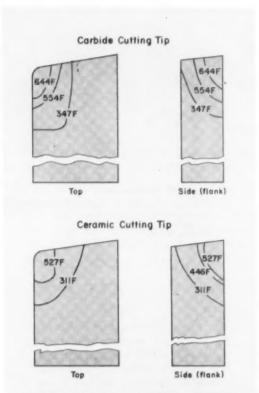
Heat distribution in carbide and ceramic cutting tool tips after equilibrium conditions have been established. Both tools were run under the same conditions.
